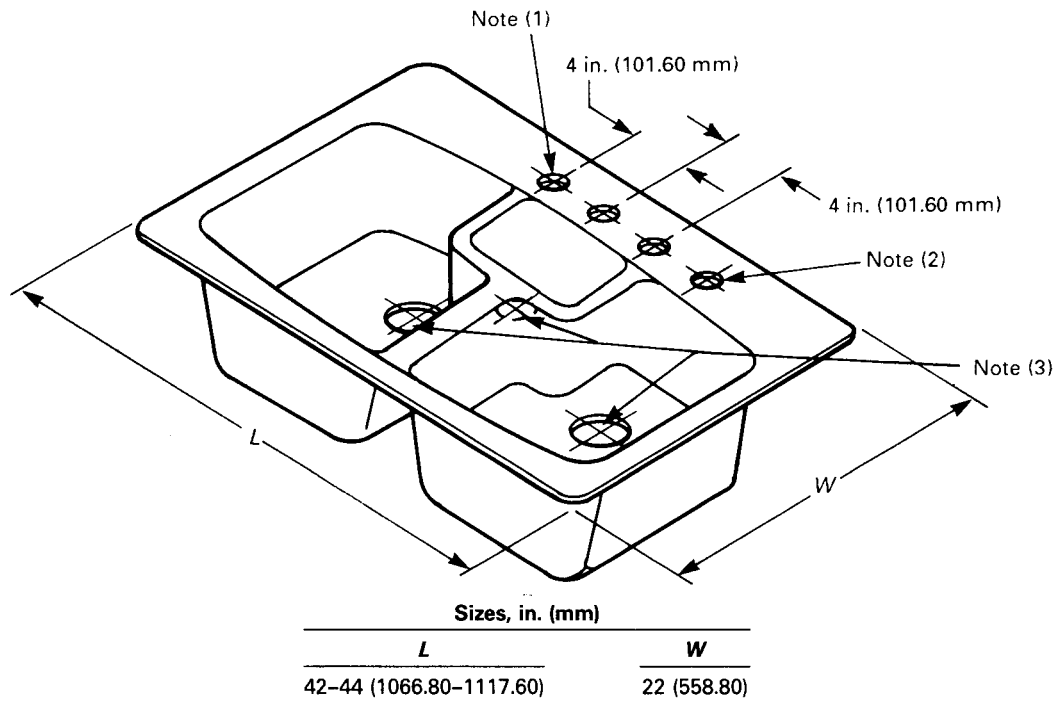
SELF-RIMMING KITCHEN SINKS WITH CENTER OUTLET
